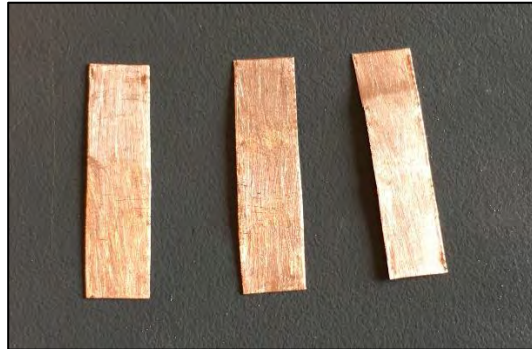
Copper strip 6 mm x 25 mm after rubbed with sandpaper
